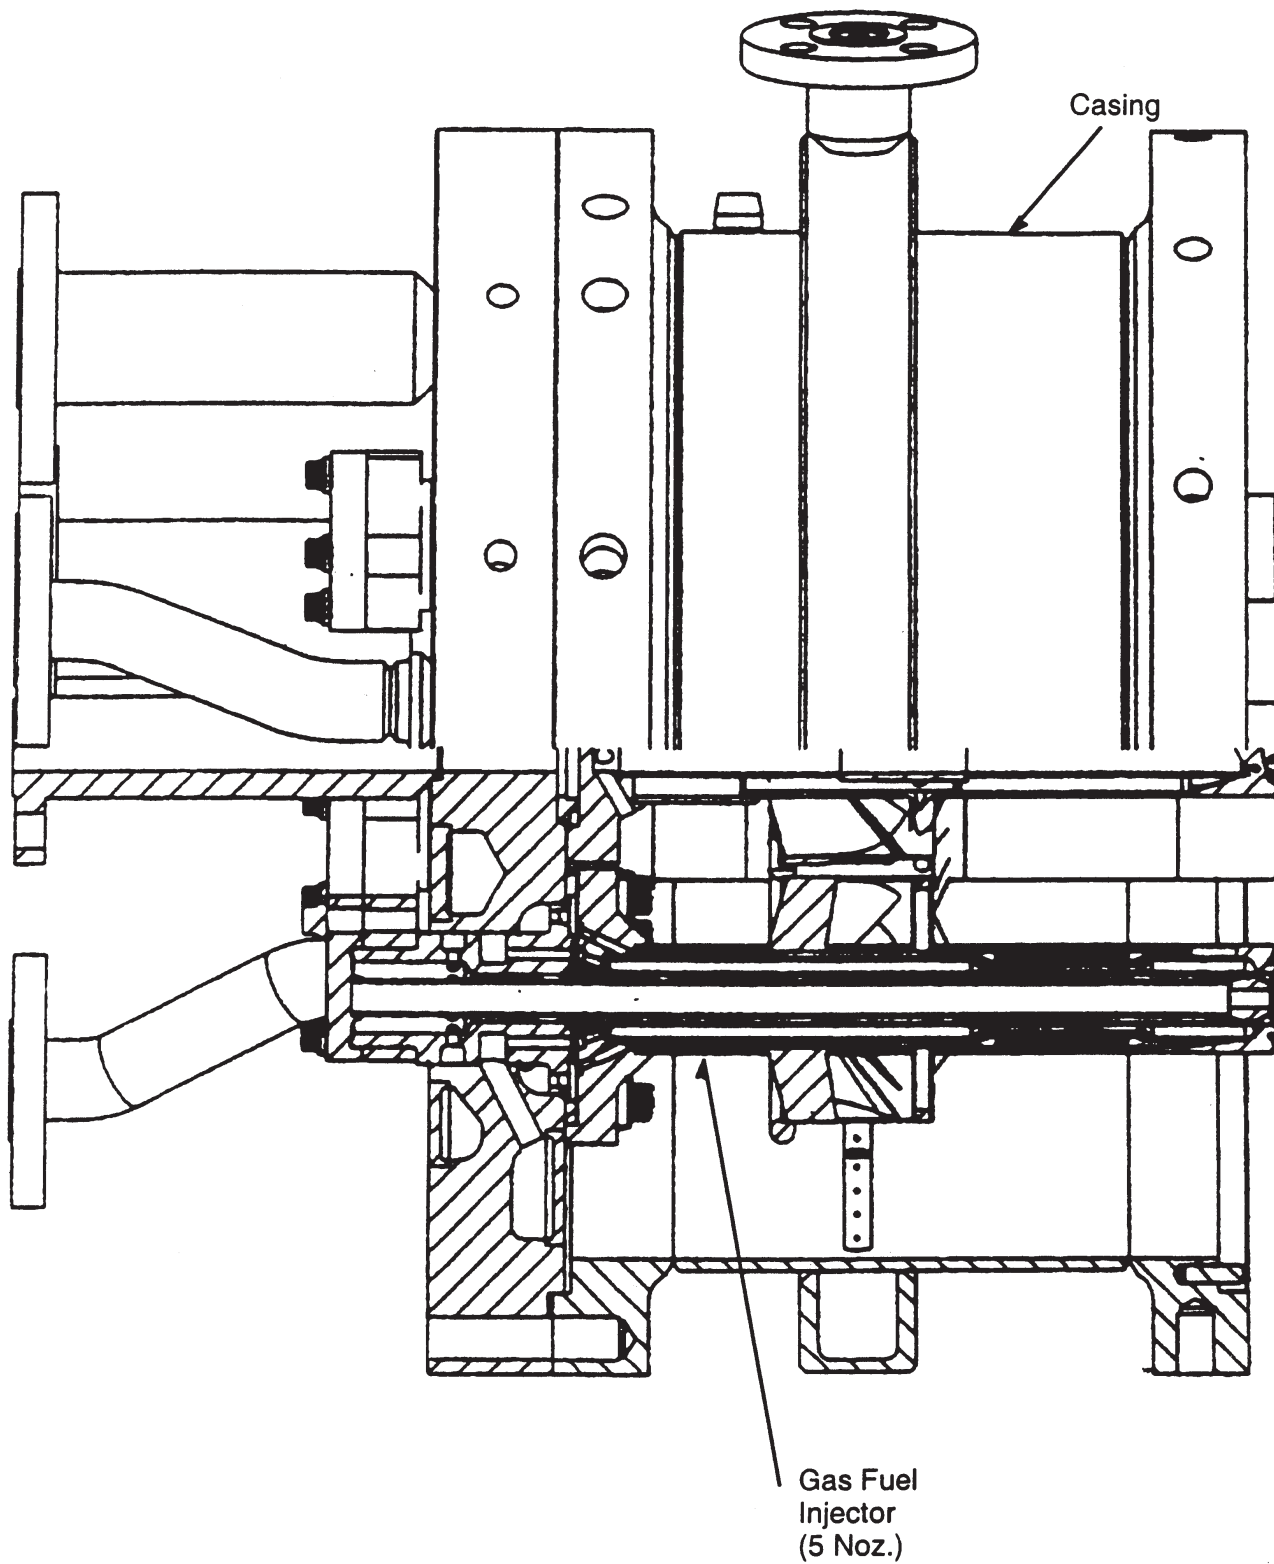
Fuel Nozzle Cover and Casing Assembly (Gas Only)
